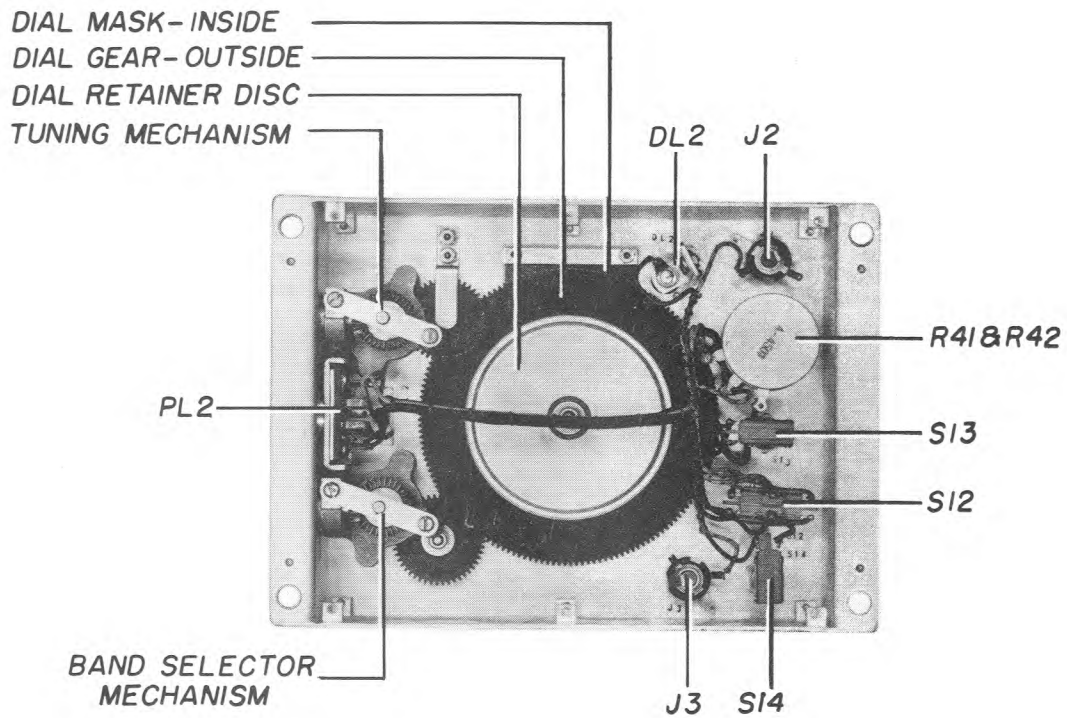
TYPE MR - IB REMOTE CONTROL UNIT
